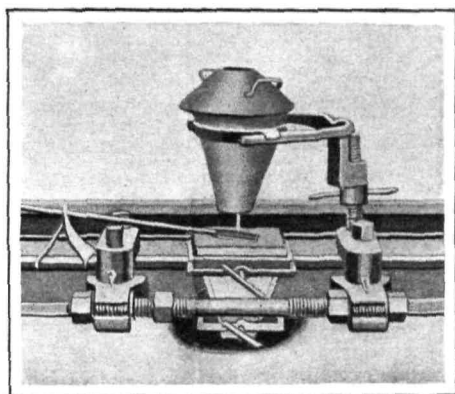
COMPLETE WELDING OUTFIT FOR
